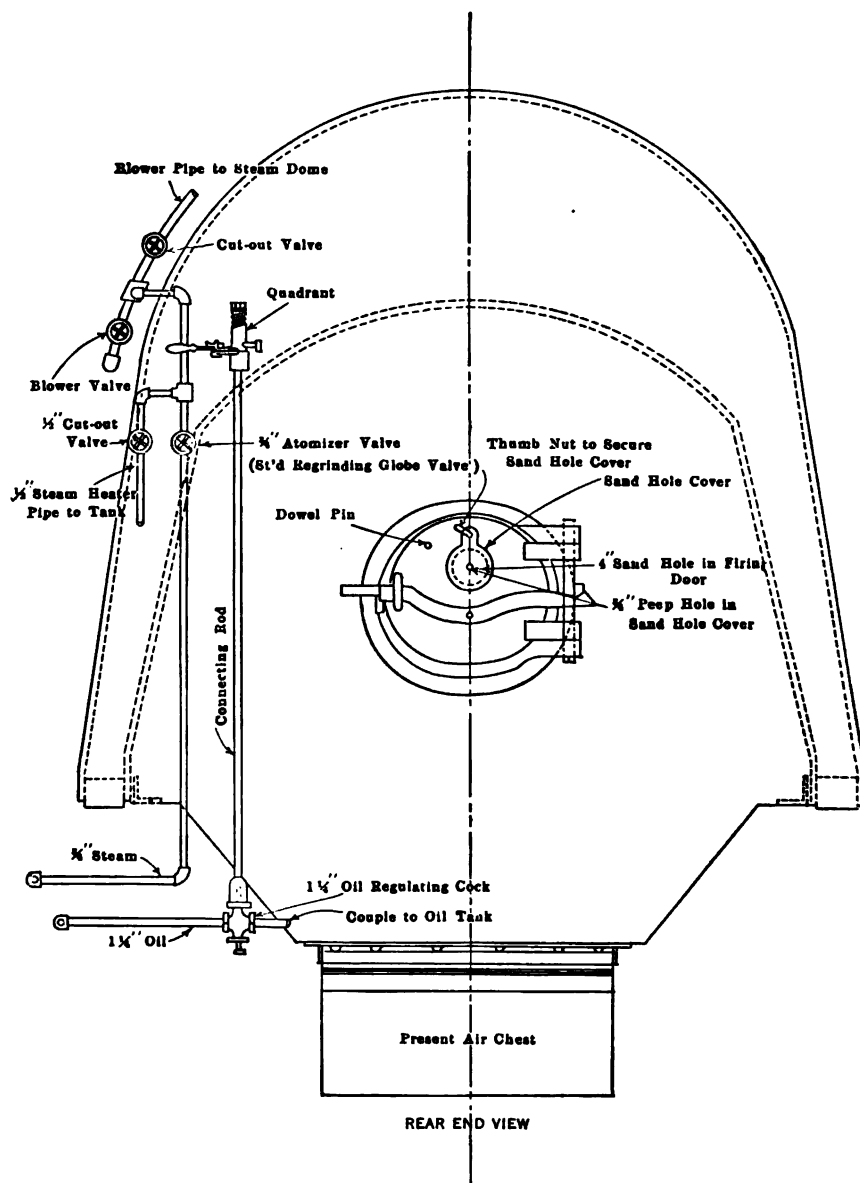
Large locomotive equipment. View showing piping and location of oil regulating cock, quadrant, etc.
